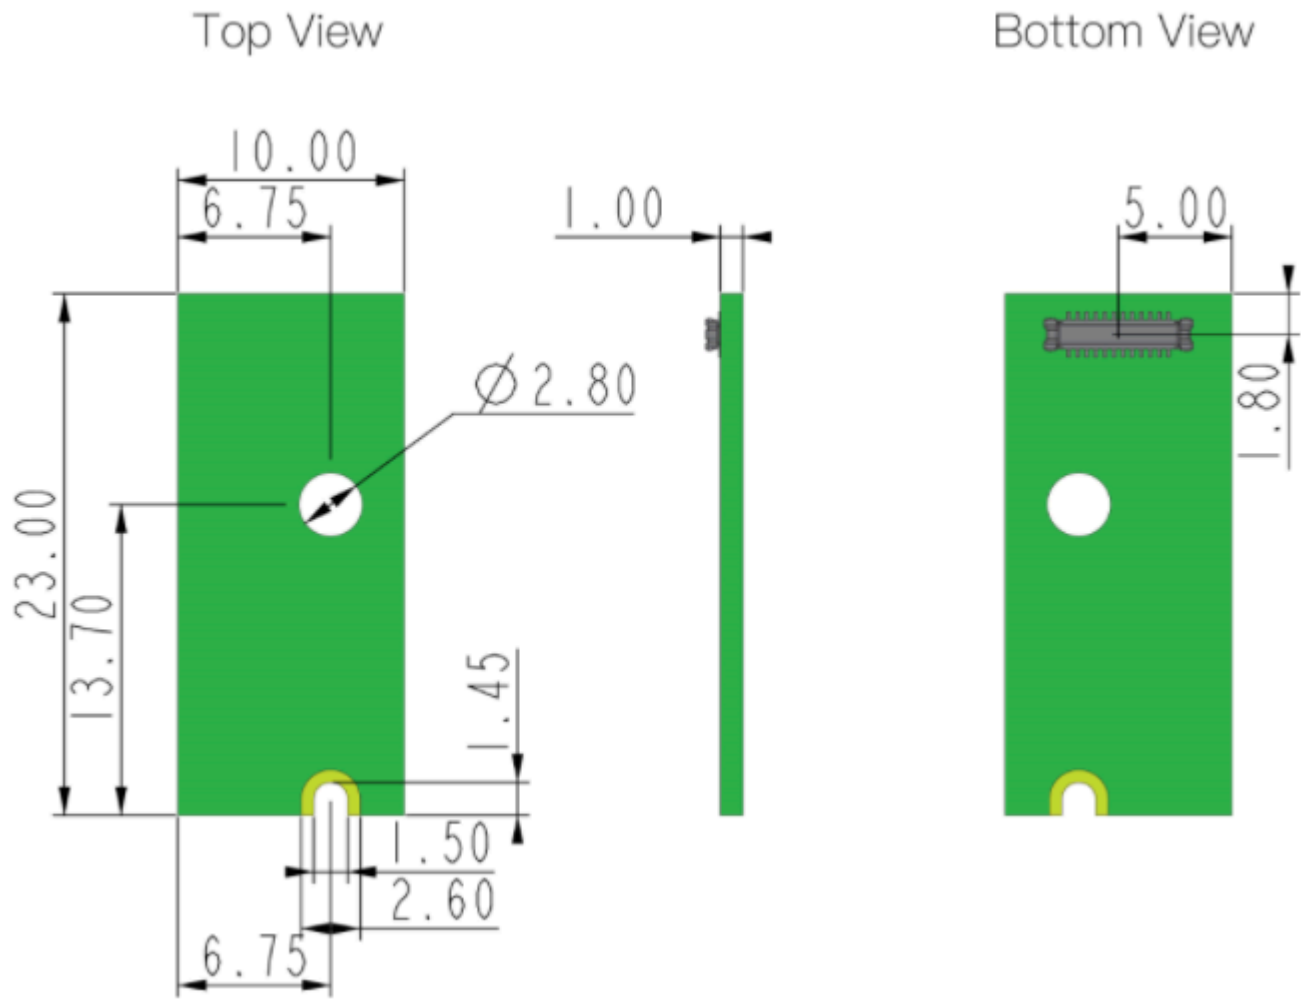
RAK12059 WisBlock Liquid Level Sensor Mechanic Drawing
